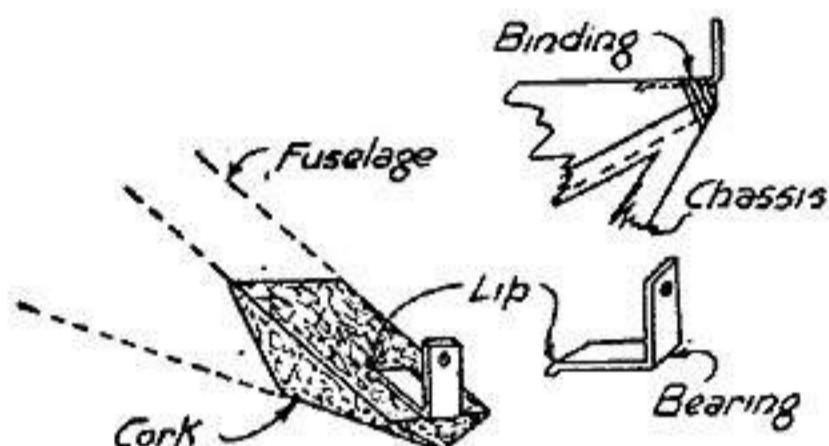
The bearing assembly, showing the lip formed in the bearing and the cork nose piece.
